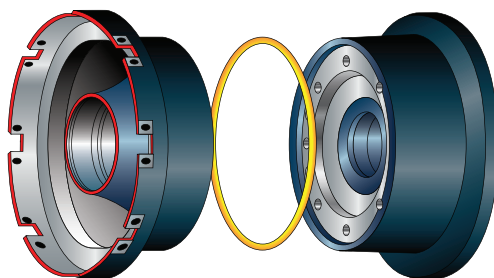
Two-piece split-wheel aircraft wheels found on modern light aircraft.
